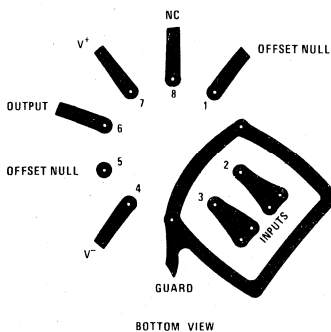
Printed Circuit Layout for Input Guarding with TO-5 Package
